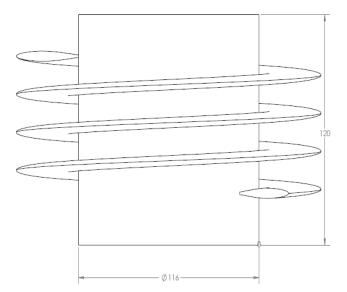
Helical fin with airfoil cross section model used for the experiment
